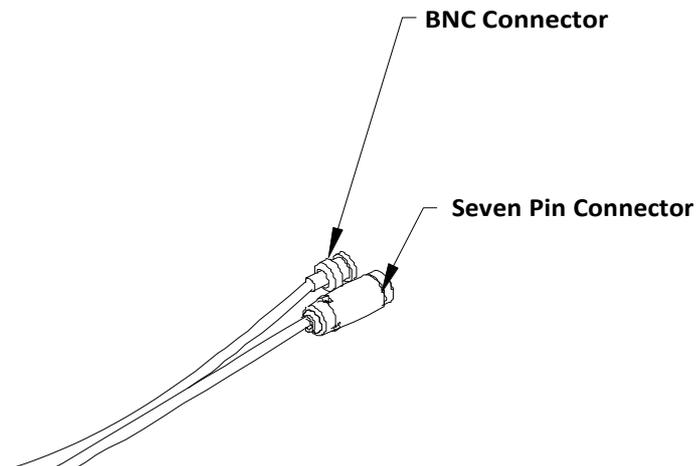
, Model 2605 Bench-Top Sealing Head Cable Attachment
